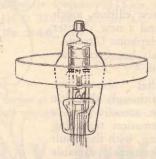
The electrodes are electrically heated by a high-frequency coil to remove all traces of gas.
